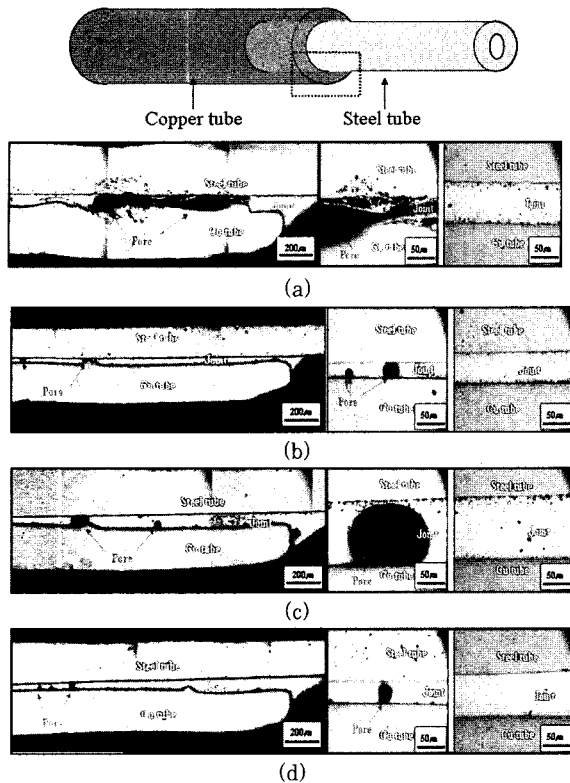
Microstructures of the steel & copper tube joint brazed at 750°C, using a propane/oxygen mixed gas flame with; (a) solid wire, (b) flux cored wire, (c) paste and (d) flux laminated strip
